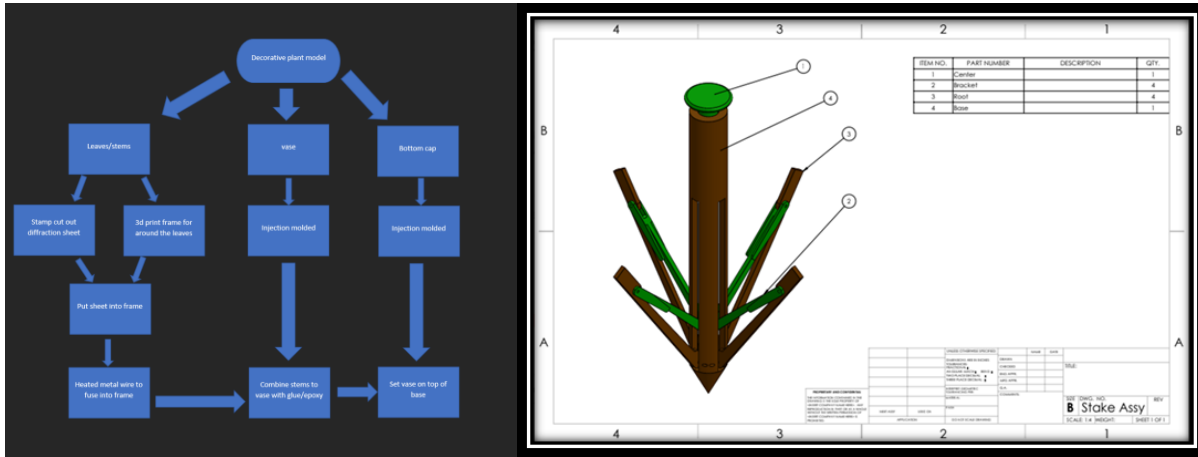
The Optical Flower Décor b. The Expanding Root assembly
